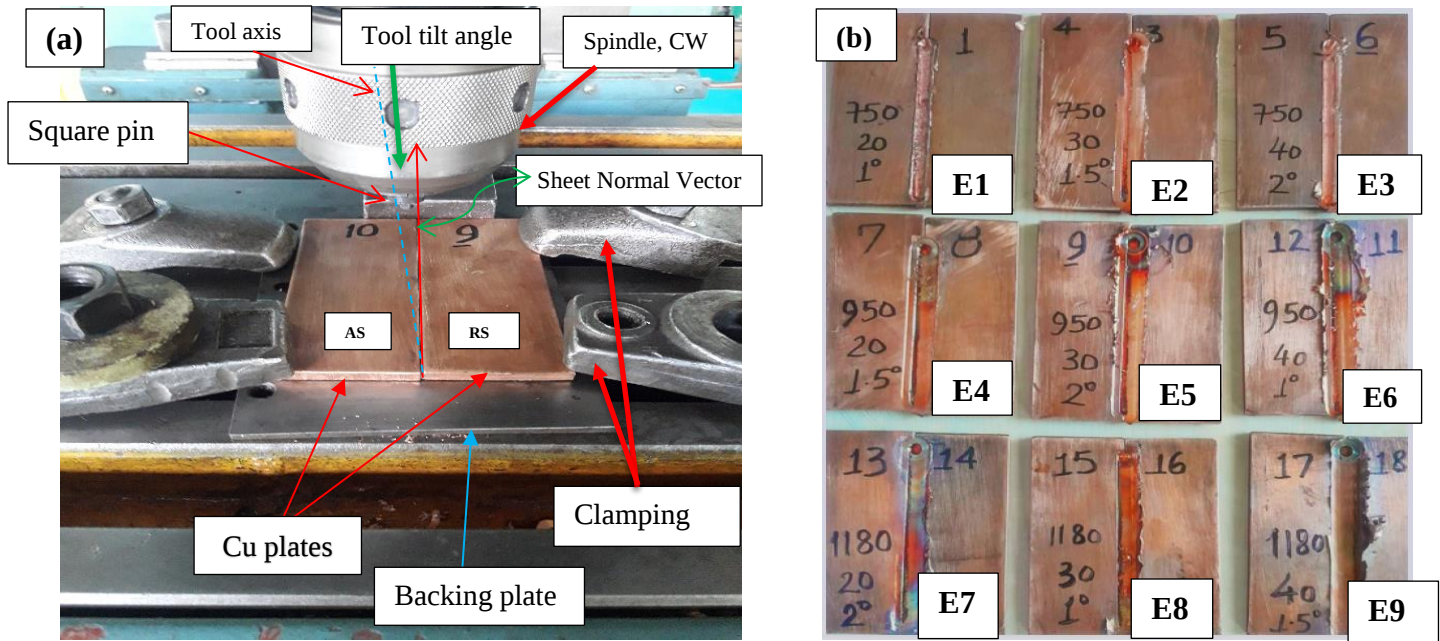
Schematic sketch of (a) weld joint and tool, (b) welded samples E₁, E₂, E₃, E₄, E₅, E₆, E₇, E₈, E₉.
